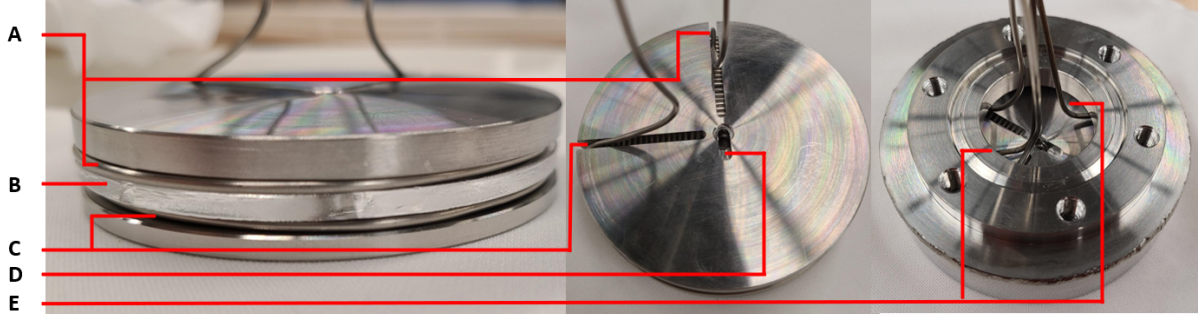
As-built heater assembly: (a) axial guard heater, (b) quartz insulator, (c) main heater, (d) center thermocouple slot, and (e) side thermocouples placed in welded heater assembly cup.
